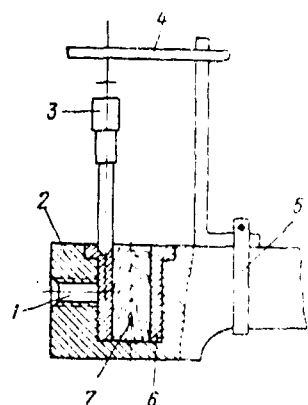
Drilling Out the Bearing Bushing of Vertical Rudder: 1 - hole for plug; 2 - thrust bearing; 3 - drill; 4 - clamp; 5 - collar; 6 - bushing; and 7 - wooden arbor.
